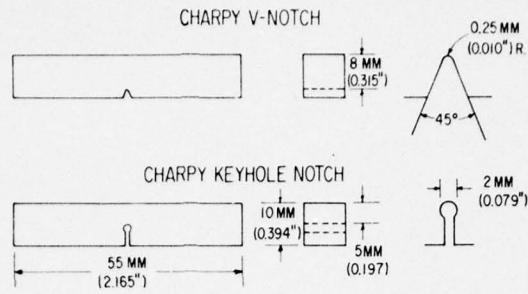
Charpy-V and Charpy-Keyhole test specimens.
